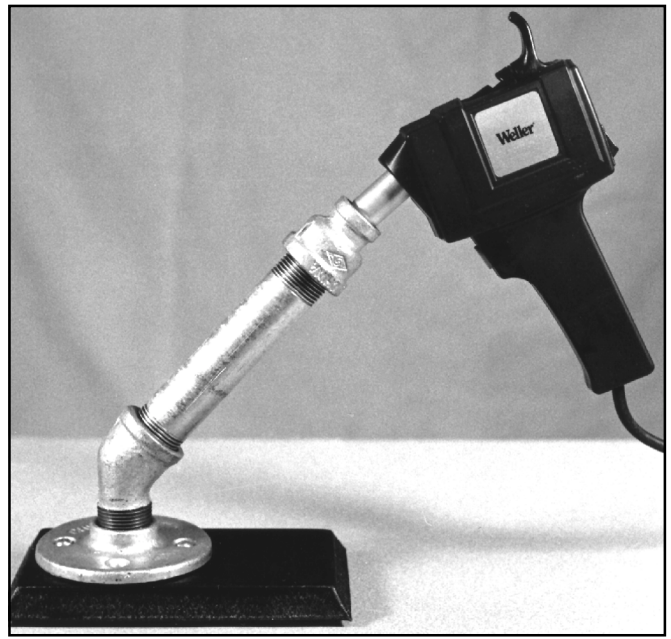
The SCD100 tip touches this homemade stand only on the internal pipe threads, so the stand doesn't draw off much heat.
